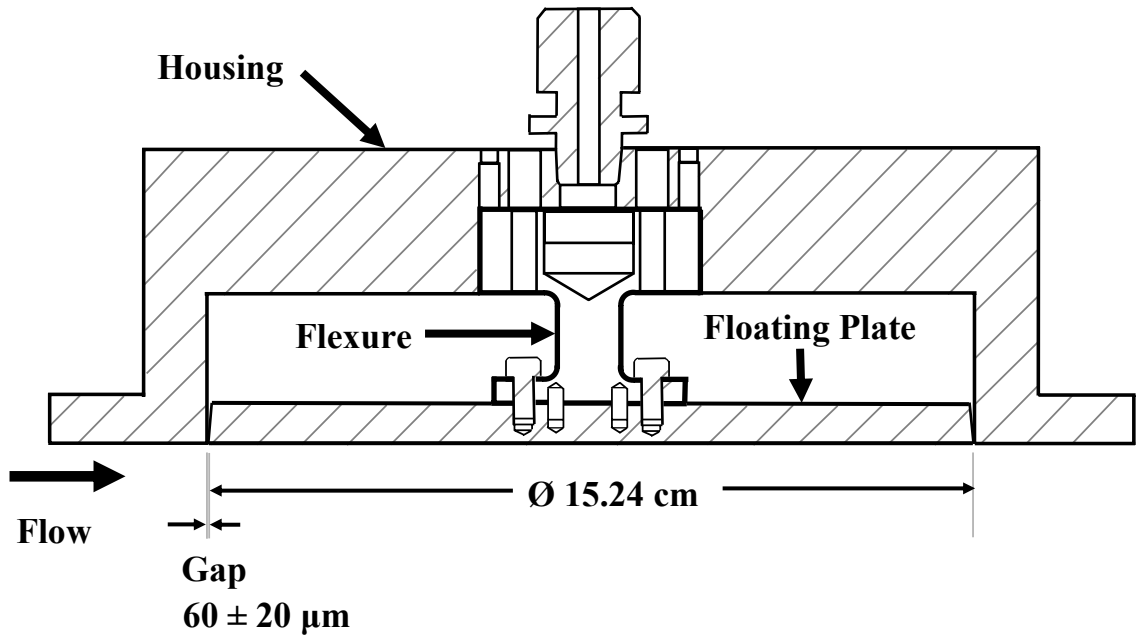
Cross sectional schematic view of the skin-friction balance with floating plate, flexure and housing.
